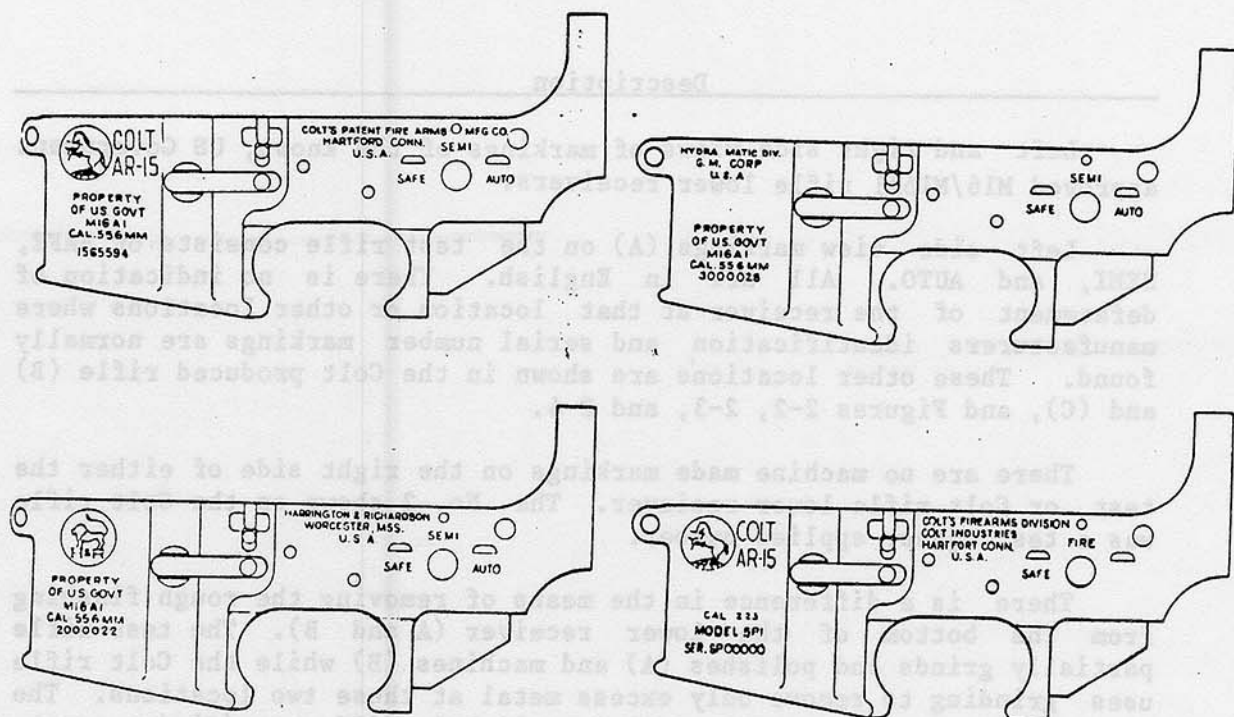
Left side view of M16A1 rifle lower receiver markings for Colt (upper left), General Motors Corp. (upper right), and Harrington & Richardson (lower left). Colt Commercial Sales (semiautomatic fire) is at lower right.
